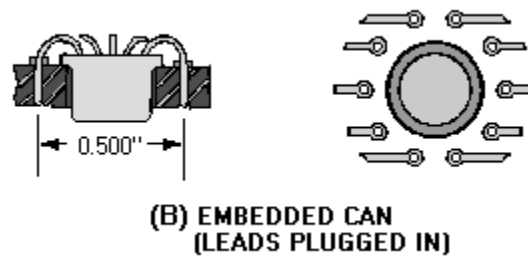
B.—TO-5 mounting EMBEDDED CAN(LEADS PLUGGED IN)
